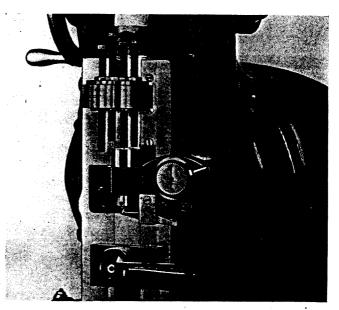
Turret Type Spindle Stop with Dial Test Indicator.
